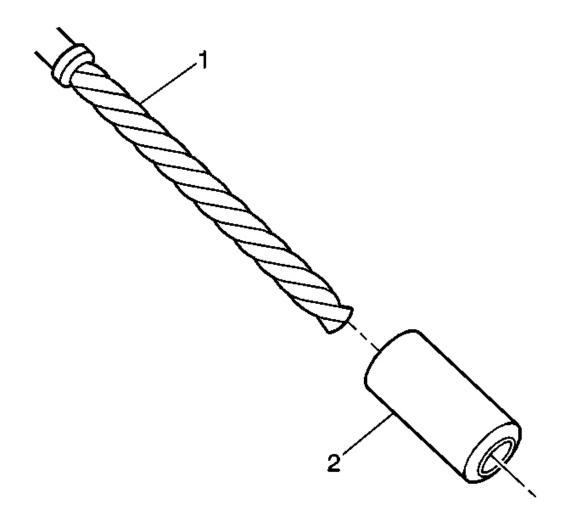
View Of Stop Collar & Counterbore Drill Courtesy of GENERAL MOTORS CORP.
